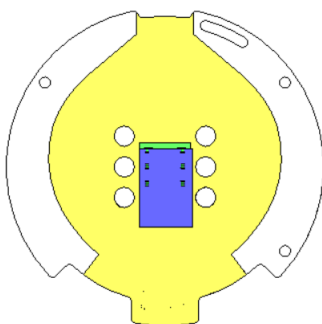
Raw PCB of the RTX8950 PCB with copper applied but antennas removed.
